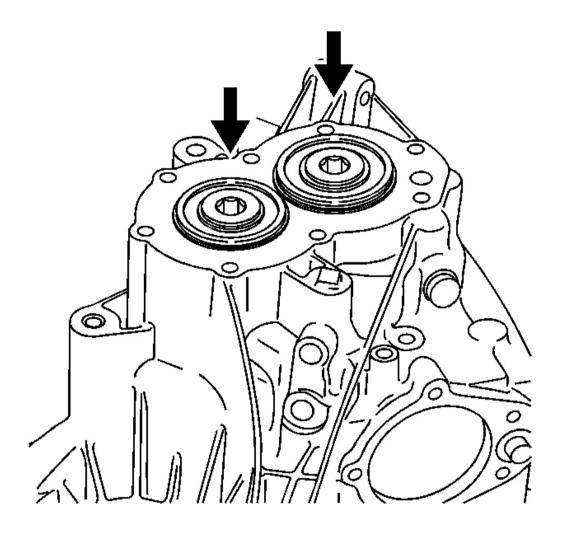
Inspecting Bearings Courtesy of GENERAL MOTORS CORP.
